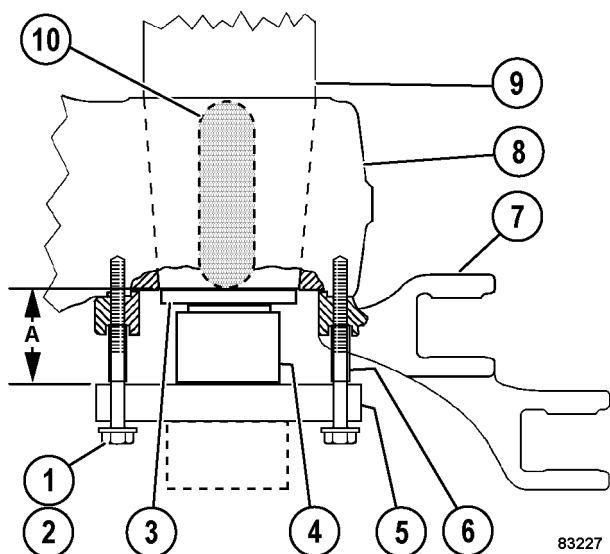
SPINDLE REMOVAL TOOL
